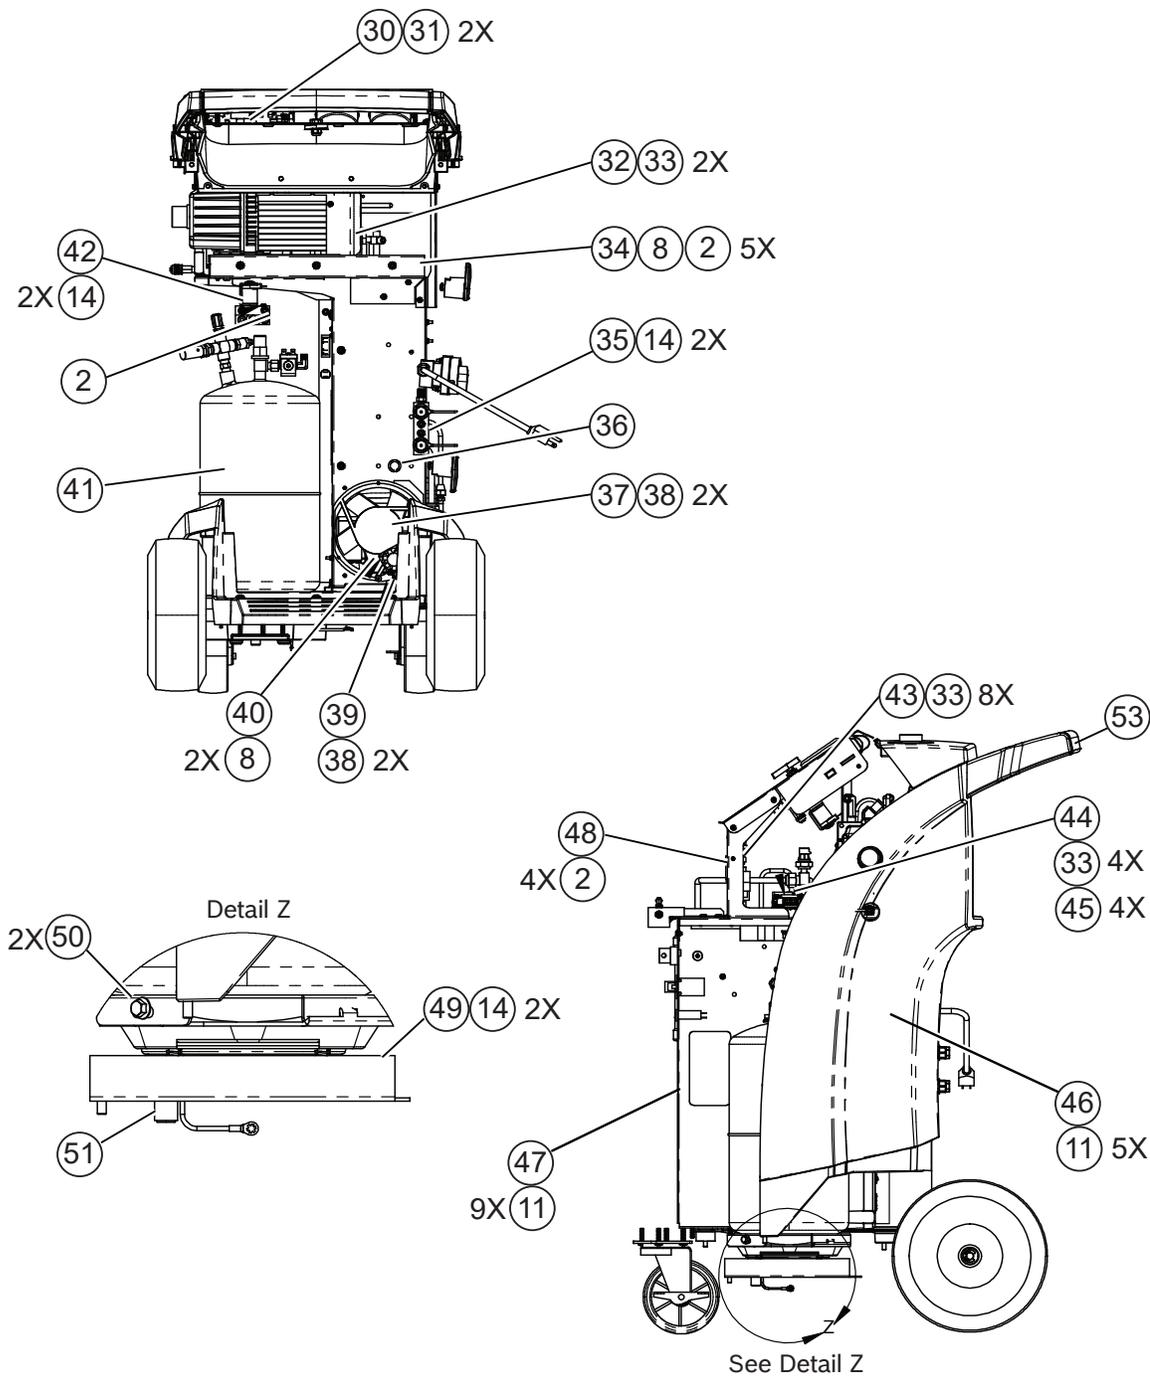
Internal Assembly (Sheet 2 of 2)
